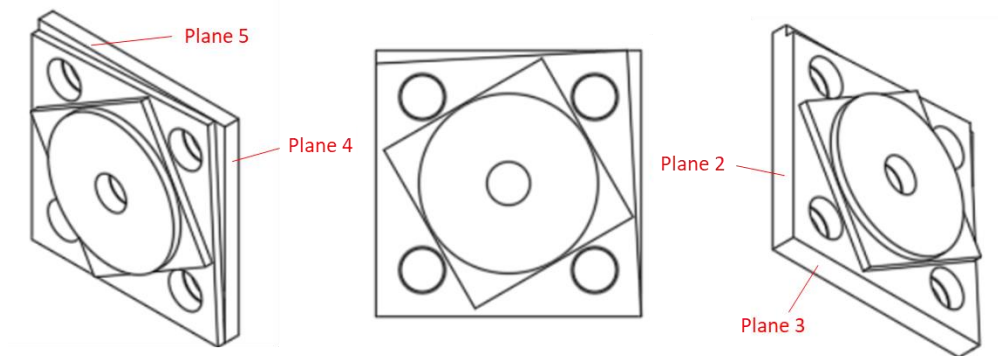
ISO-10791-7 Standard Geometry Inspection Planes
